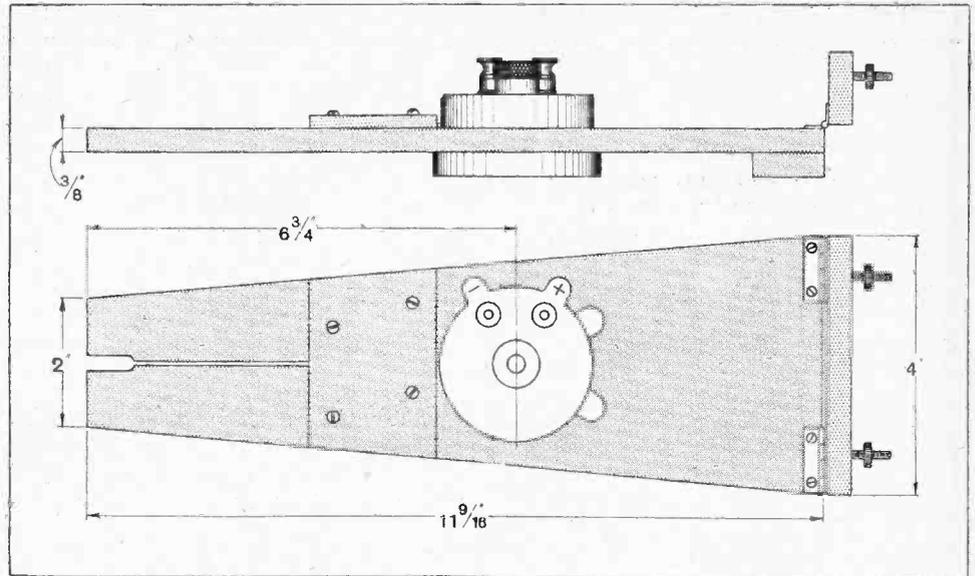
Showing the dimensions of the clamp and method of mounting the Lissencola loud-speaker unit.
